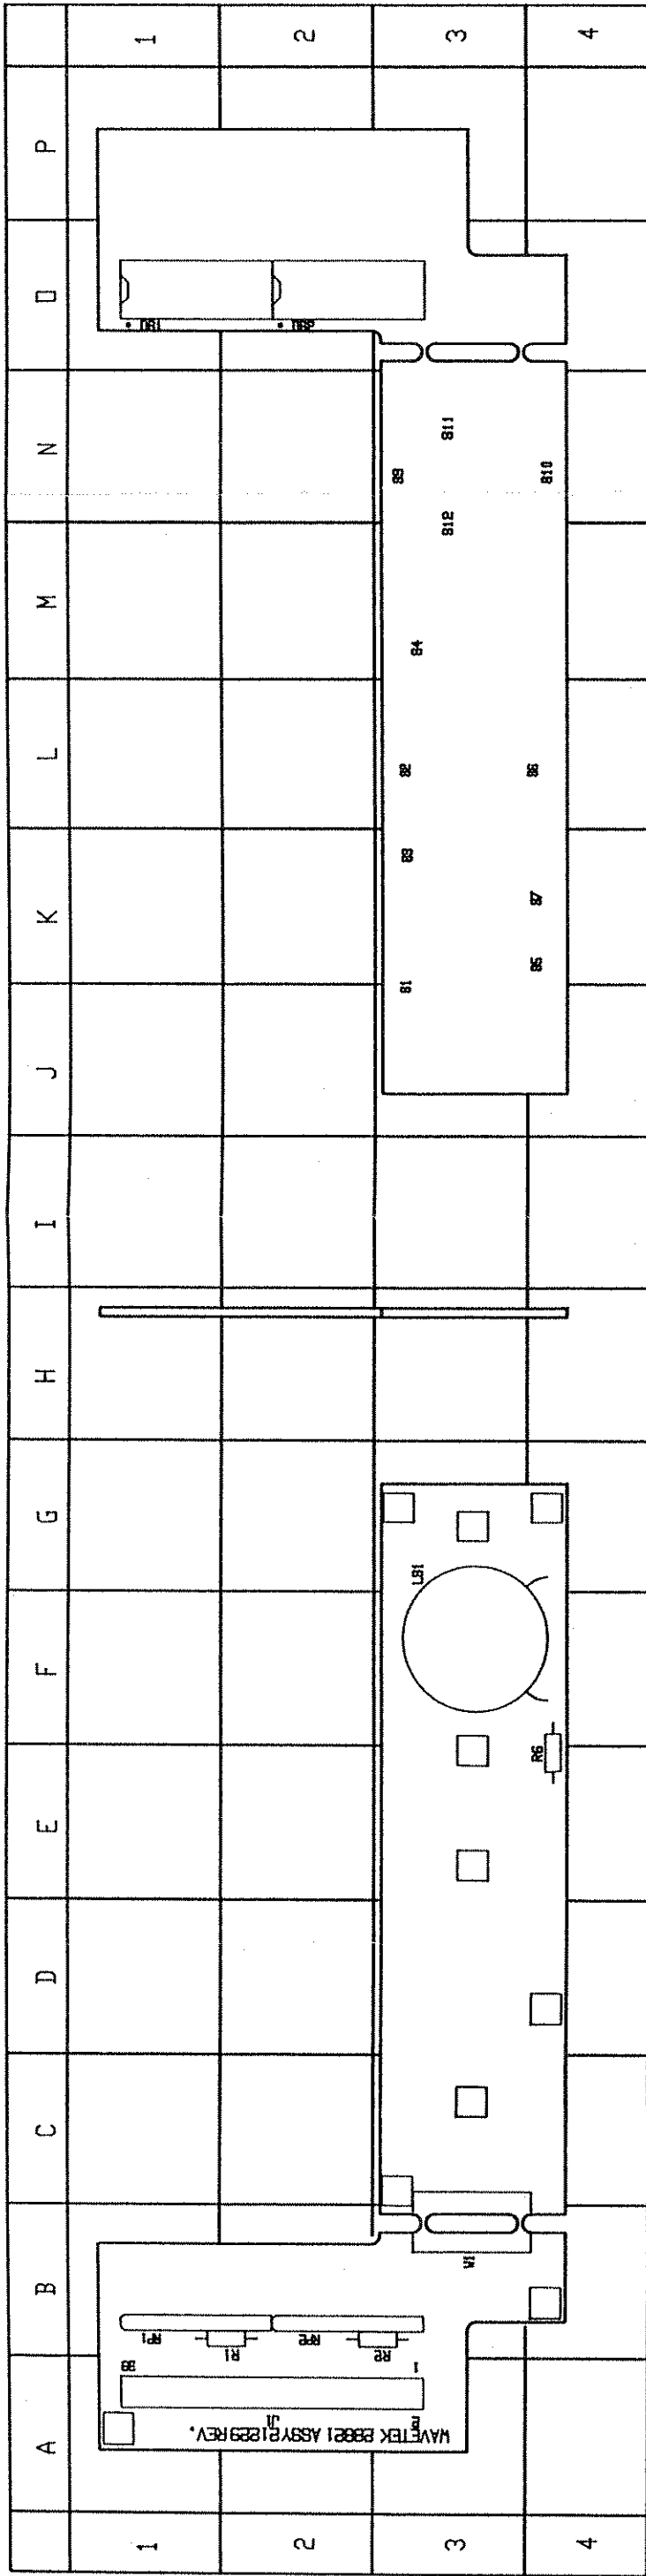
Front Panel PC Board Assembly (A3) #21229
